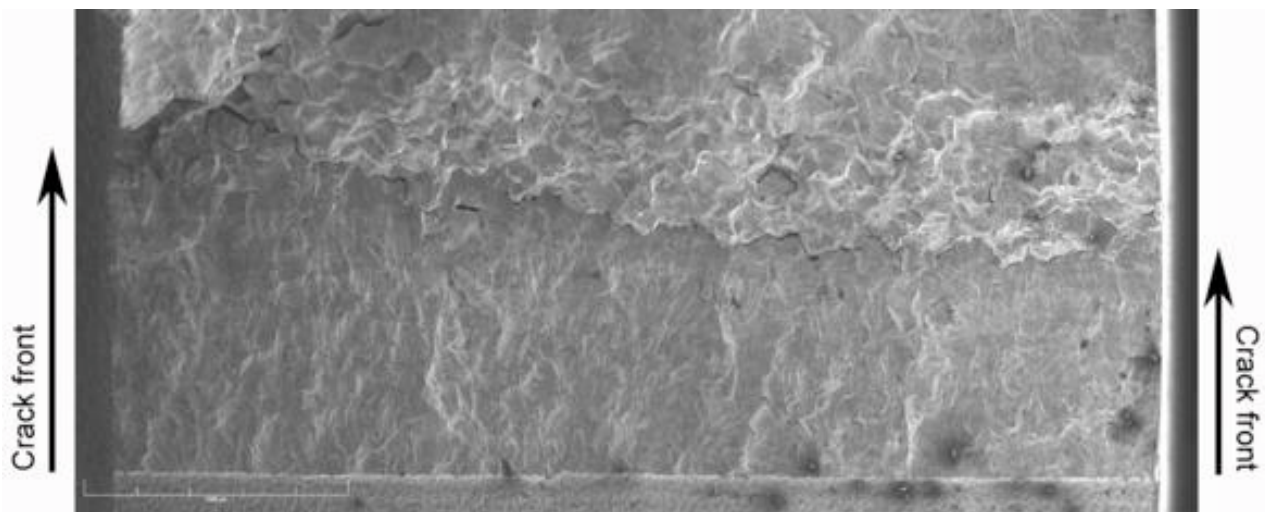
Micrograph of the fracture surface of Specimen 85-3A-TT tested in high-DO water at 289°C.
